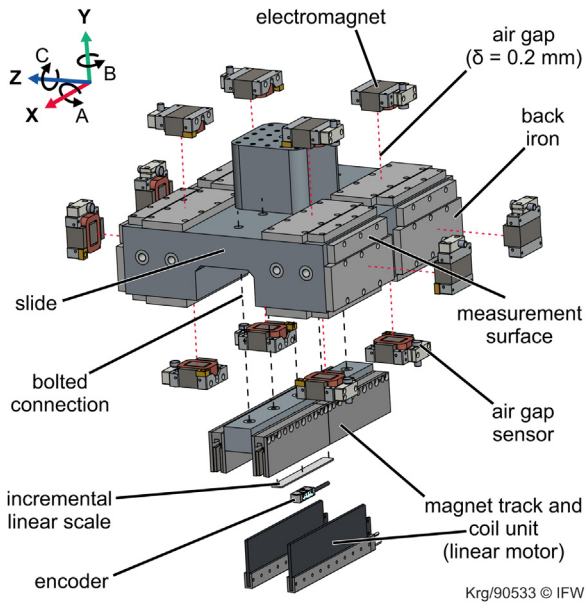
Setup of the electromagnetic linear guide (exploded view without frame).
